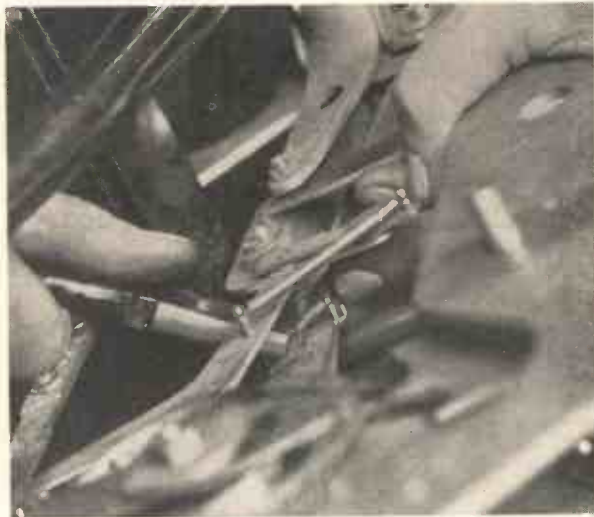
ADJUSTING THE "LEAD-IN SPRING."
